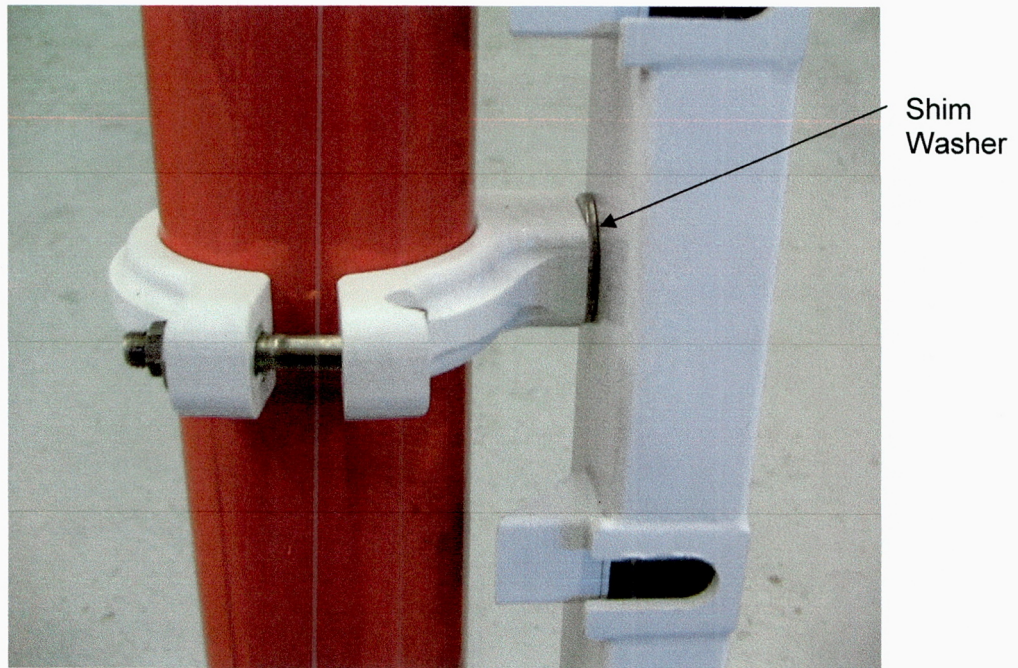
Beam Adjustment, Step 1 – Shim Rear Beam
